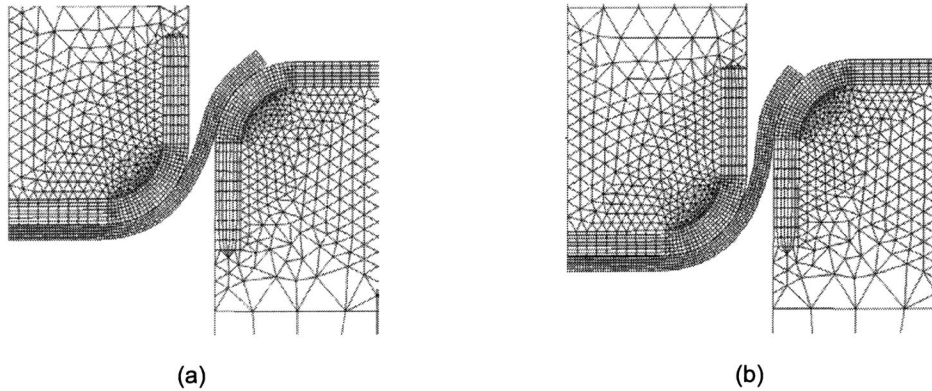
Punch-sheet-die configurations: (a) at maximum drawing force; (b) at fracture
